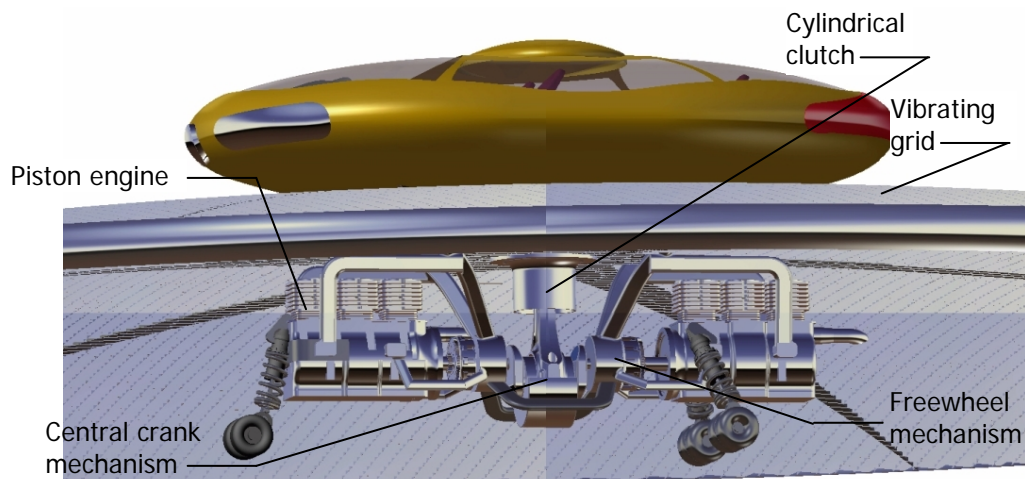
Side view of flying-car showing design details (engines' fairing and oil cavity of central crank-rod vibration mechanism are not shown)
